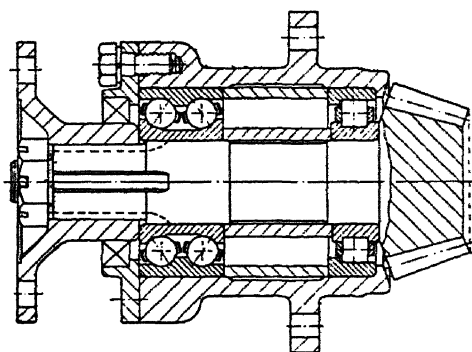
Bevel Pinion Gear Shaft Bearings.
